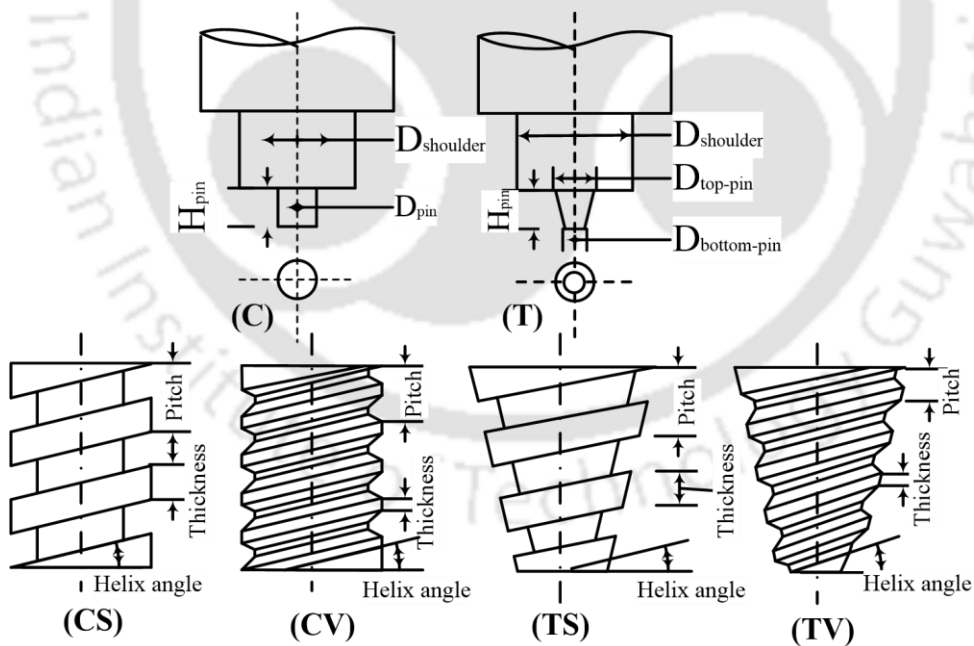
Schematic illustration of tool profile (C) Straight cylindrical pin tool, (T) Straight cylindrical square thread pin tool, (CS) Straight cylindrical V-thread pin tool, (CV) Taper cylindrical pin tool, (TS) Taper cylindrical square thread pin tool and (TV) Taper cylindrical V-thread pin tool.
